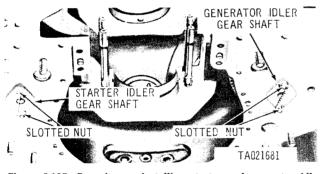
Removing or installing starter and generator idler gearshaft flange nuts.
